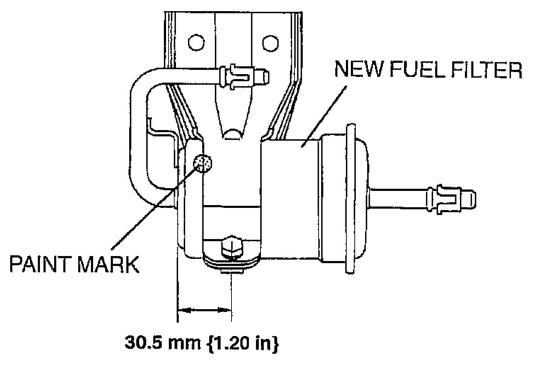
Removing Fuel Filter (High-Pressure) Courtesy of MAZDA MOTORS CORP.
